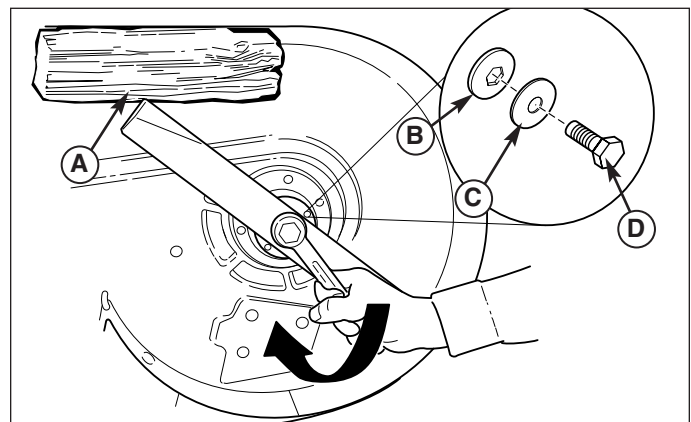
Blade Installation Mowers (44" & 50" Mowers)
